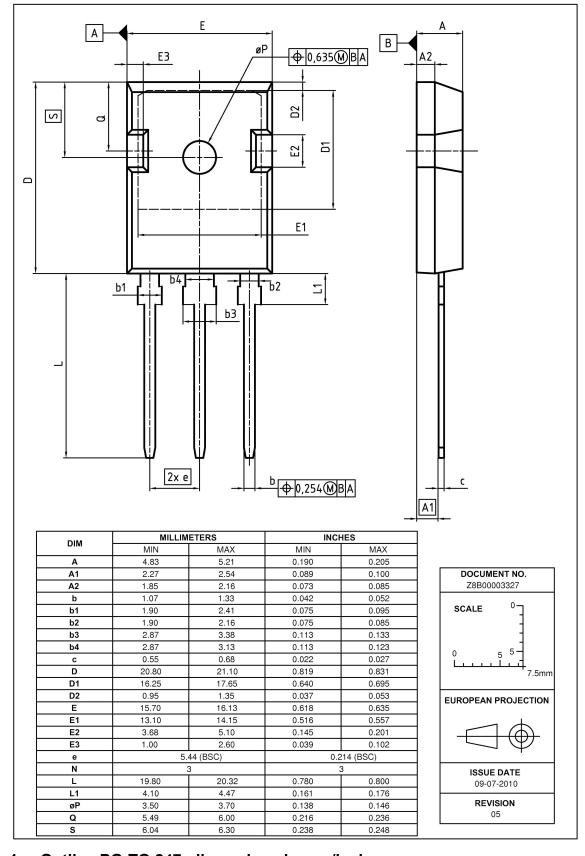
Outline PG-TO 247, dimensions in mm/inches
